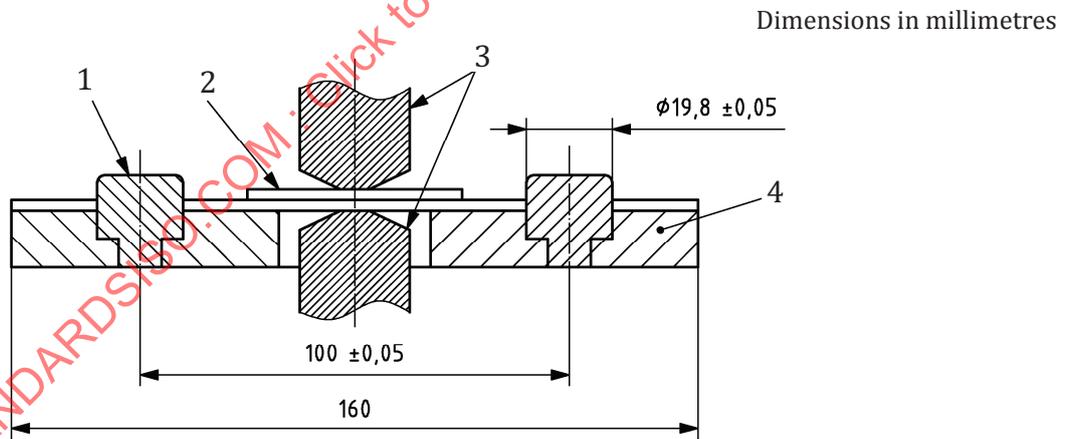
(#) and [3](#) illustrate examples of a welding jig/template, which can be used for welding the two sheets together. Two punched strips are placed at right angles to each other, held in the jig, and welded together. To obtain a statistically significant average, several specimens shall be tested.
